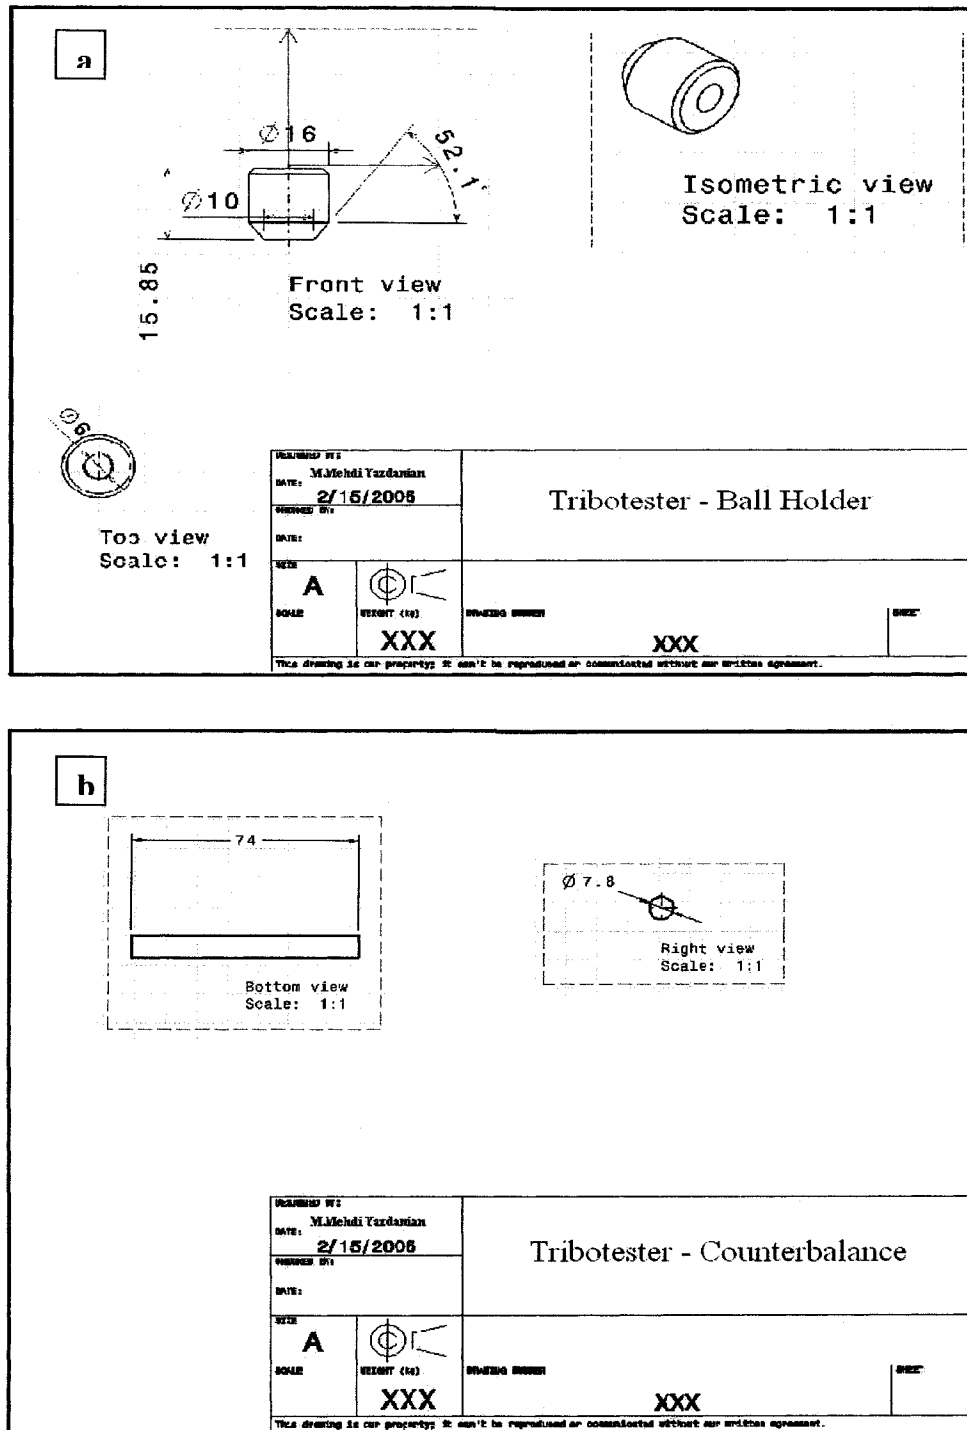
Tribo-tester parts: (a) Ball holder, (b) counterbalance (sizes are in mm)
